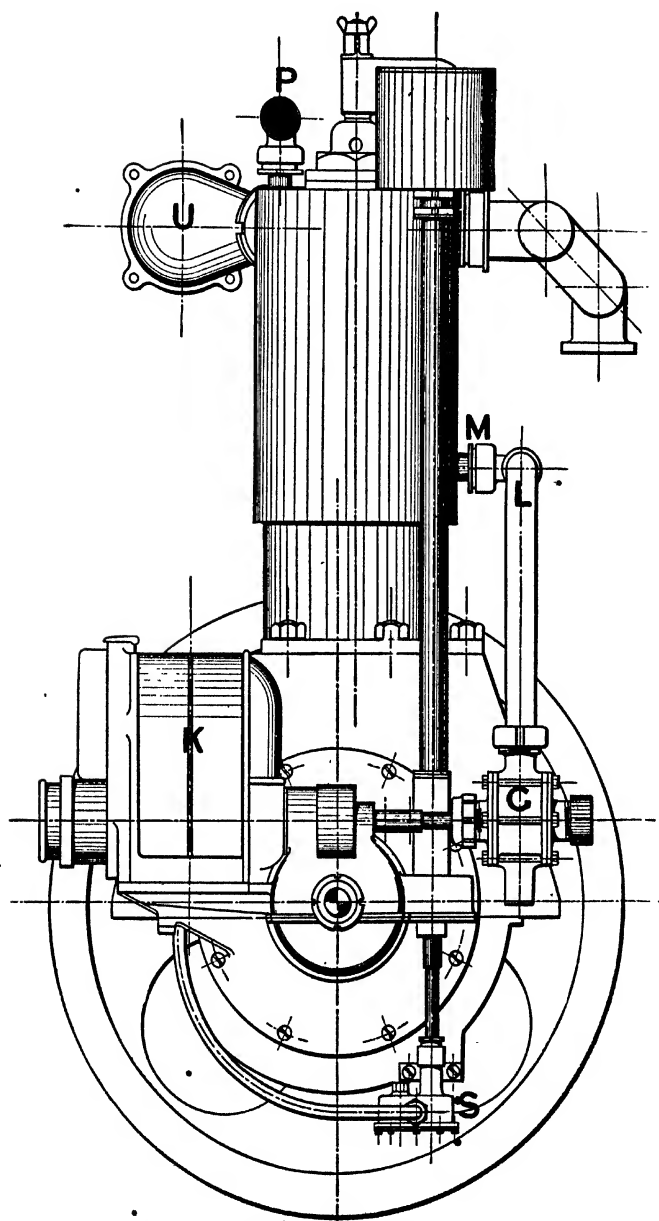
A.—End view of six-cylinder 120 H.P. Green engine, showing magneto and pumps.
